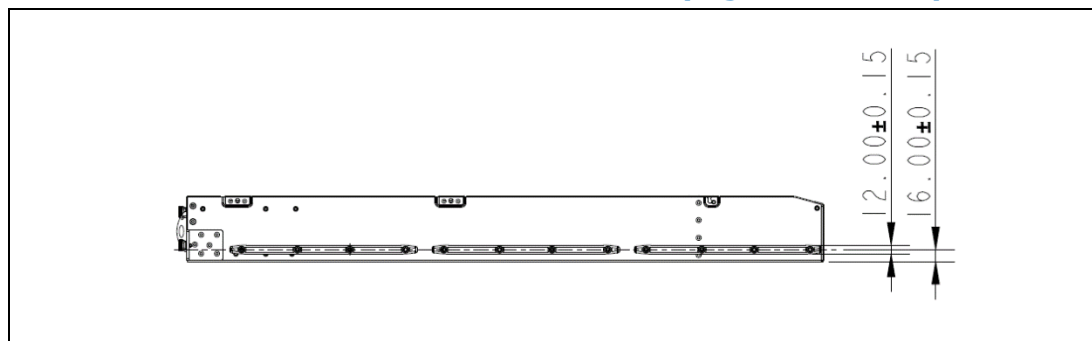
2U Server Chassis Dimension with Ear (Left-Side View)
